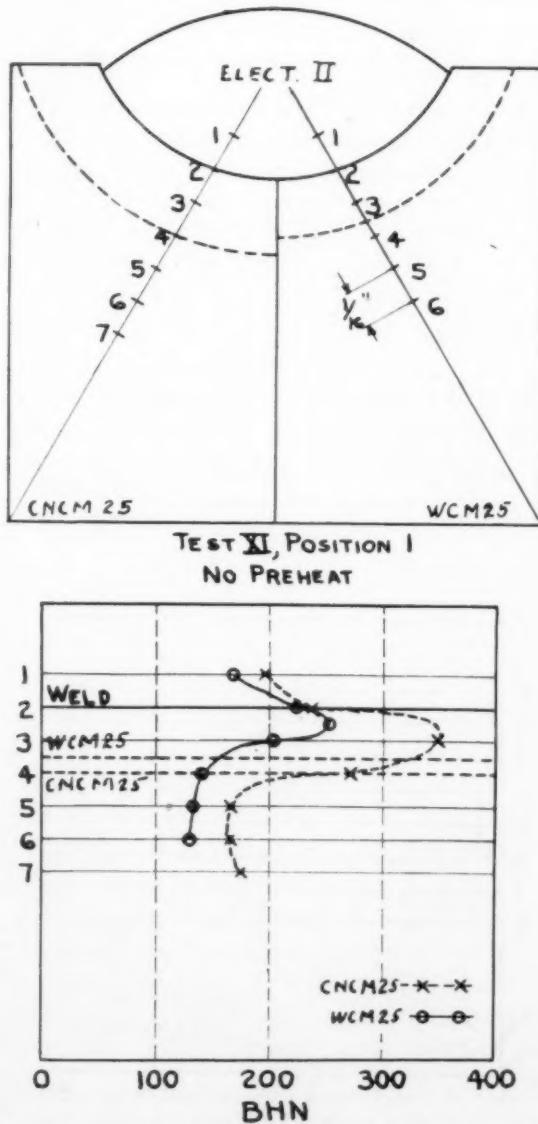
LOCATION OF HARDNESS TESTS AND HARDNESSES DEVELOPED IN STEEL CNCM25 WELDED TO STEEL WCM25 WITHOUT PREHEAT AT THE BEGINNING OF WELD.
